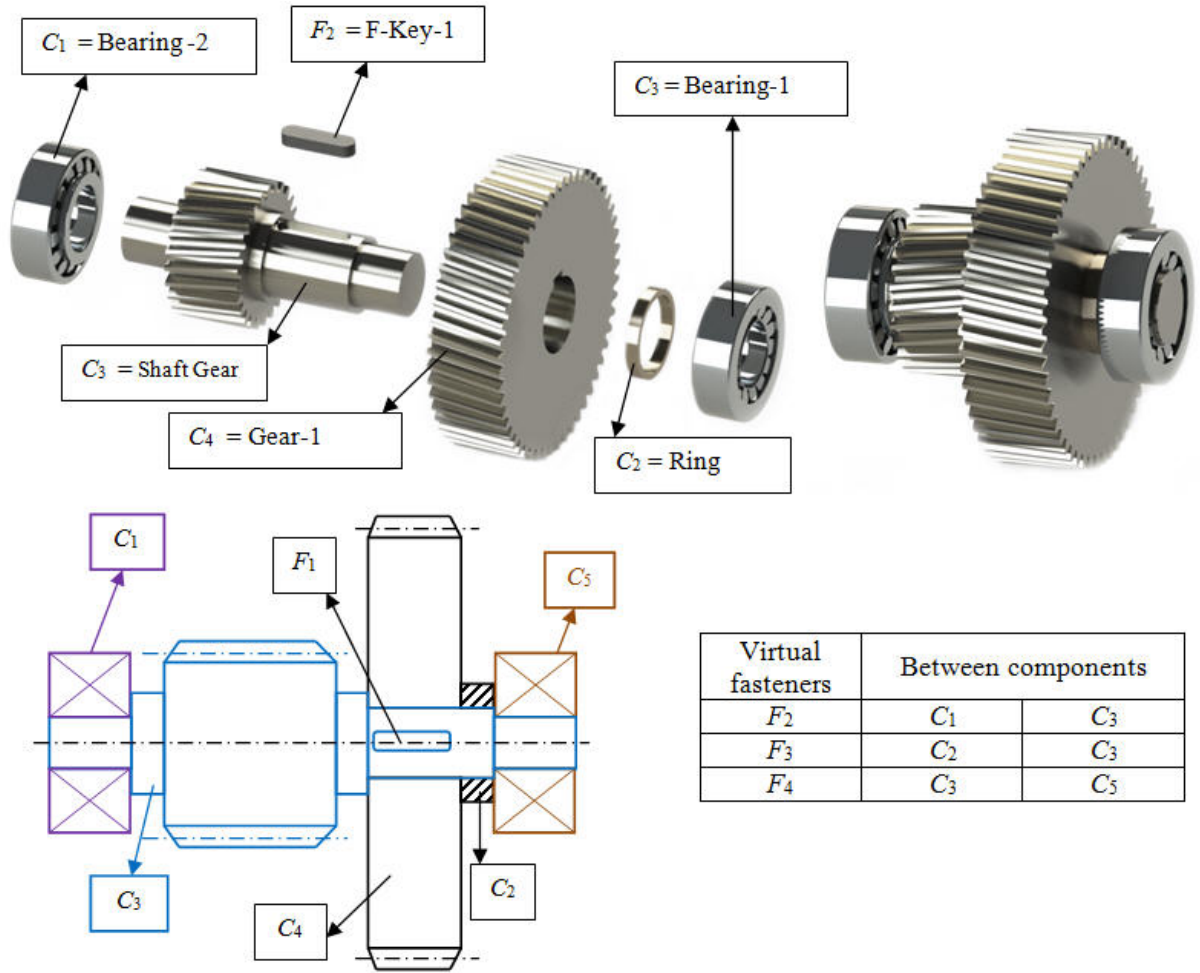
Exploded view, assembly and cross-section view of subassembly shaft with gears.
